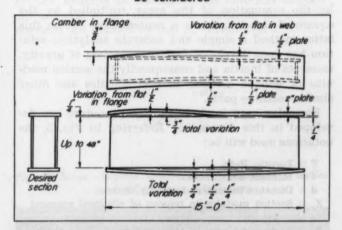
Below—An example of possible effects of natural tolerances on weldment. Regular mill tolerances on plate, shapes, etc., as well as cutting and fitting tolerances must be considered
